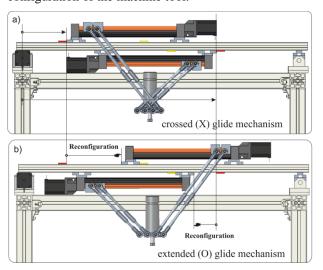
Example of reconfiguration in X and O configuration of hybrid machine tool [2]
